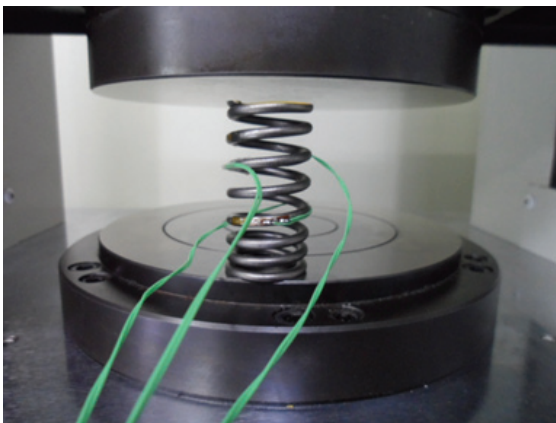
Photo of strain gauges attached to the cylindrical spring
